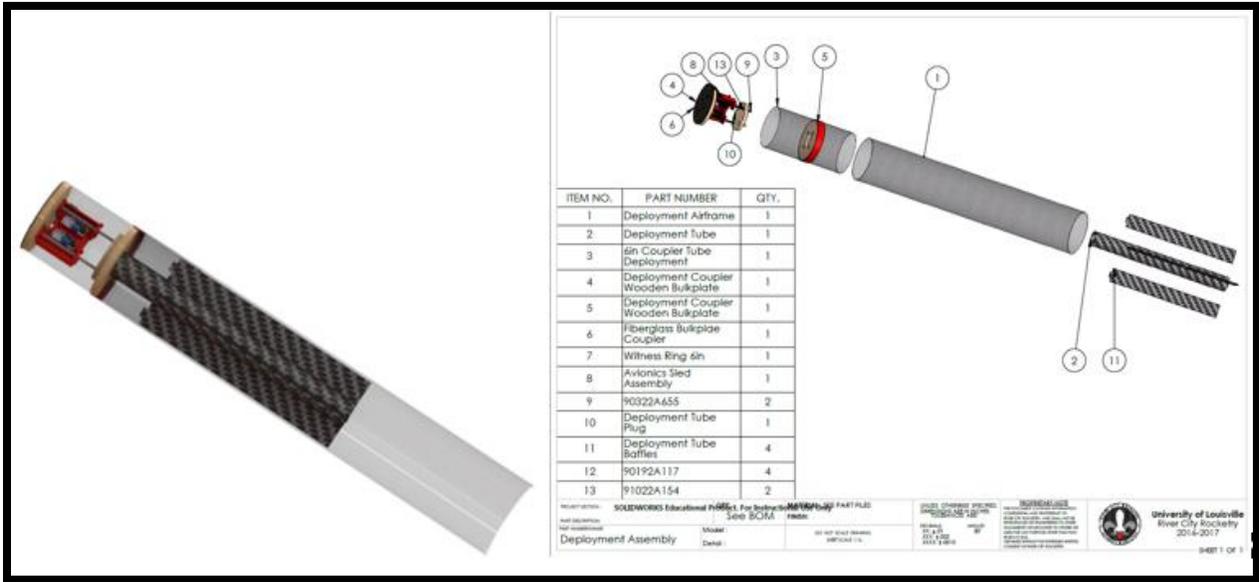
Deployment Bay section view rendering and detailed exploded view.
